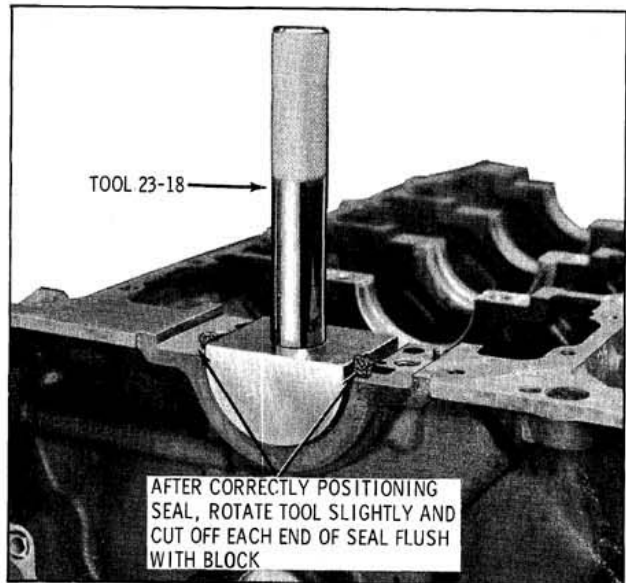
Installing Rear Main Oil Seal - Upper Half 425 Cubic Inch
